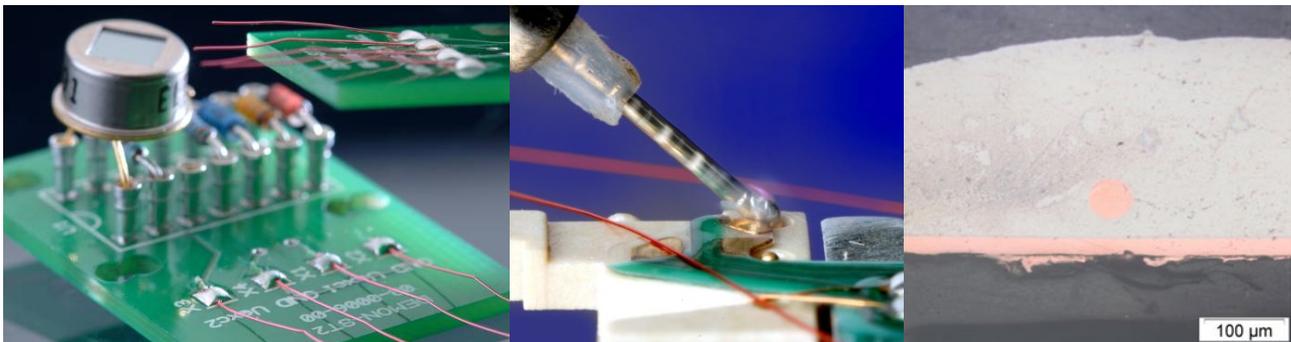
Laser soldered enameled copper wire on PCB contact pad (left [24]), joining process with solder core wire feed (middle) and cross section of the solder connection (right).
